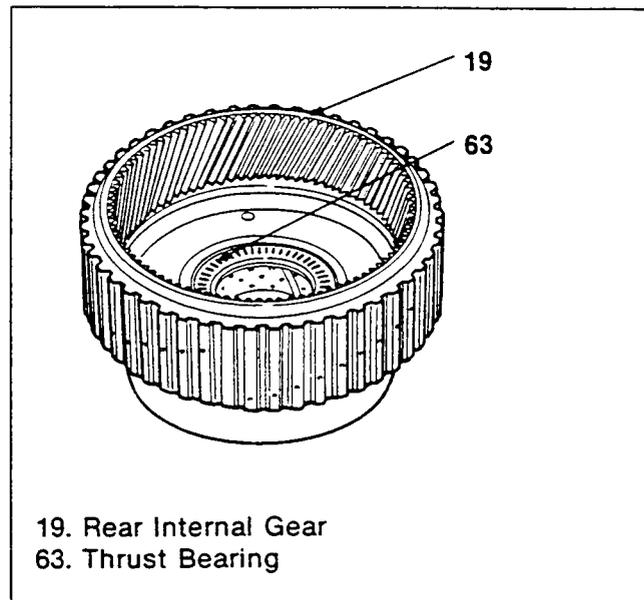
Forward Clutch Hub and Rear Internal gear Installation (1)
